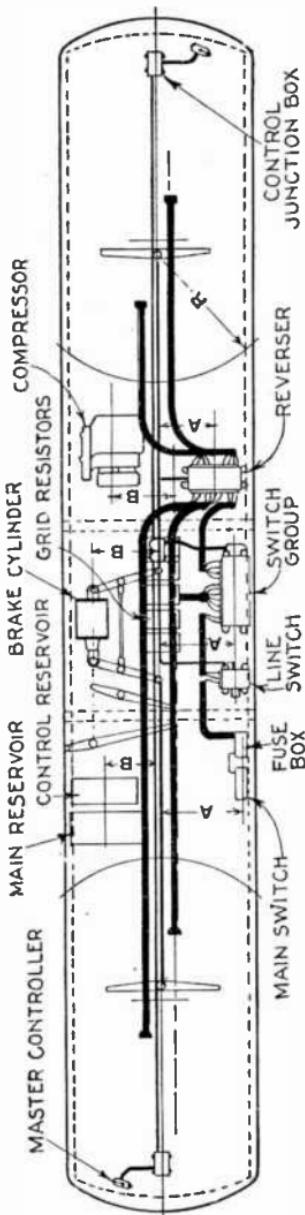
,271.—Typical car layout equipped with Westinghouse type HL unit switch control.
